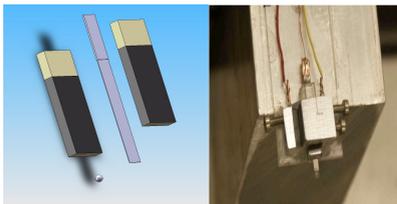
(left) Exploded solid model of 1D probe (right) Photo of 1D probe
